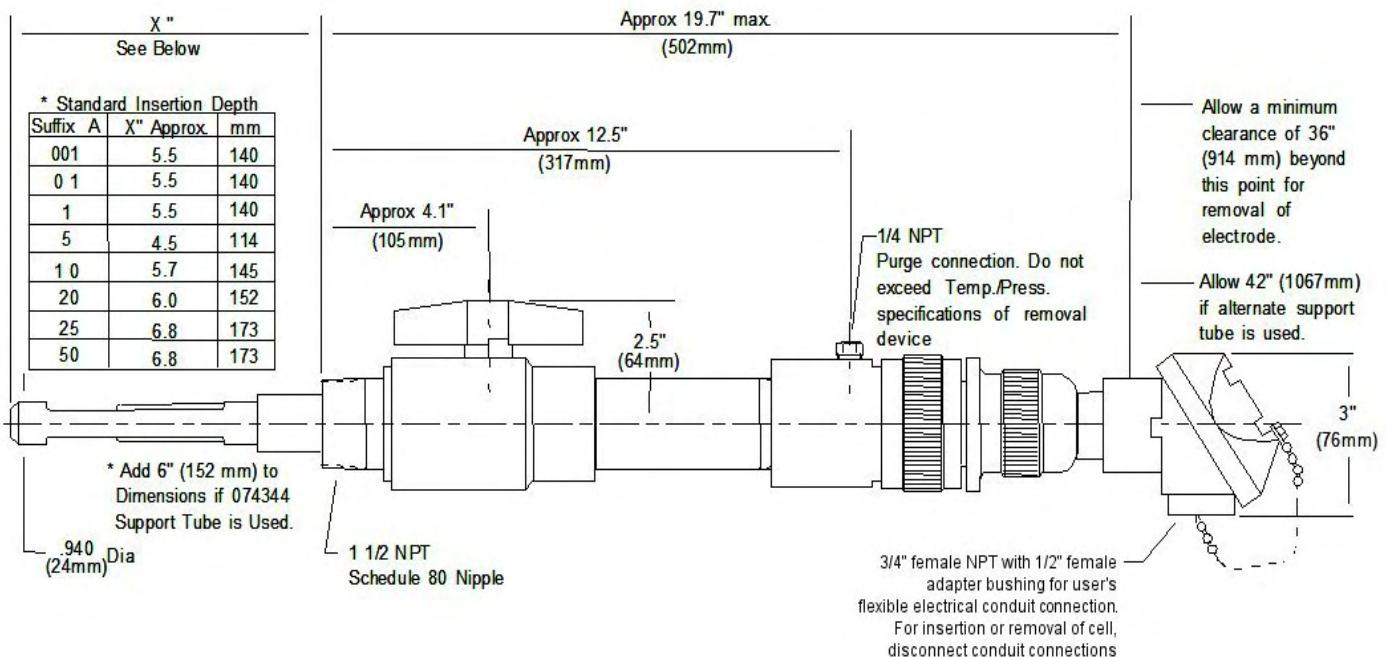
Outline and Dimension drawing for Conductivity Cell, Insertion Type with CPVC Removal Device and Universal Head
